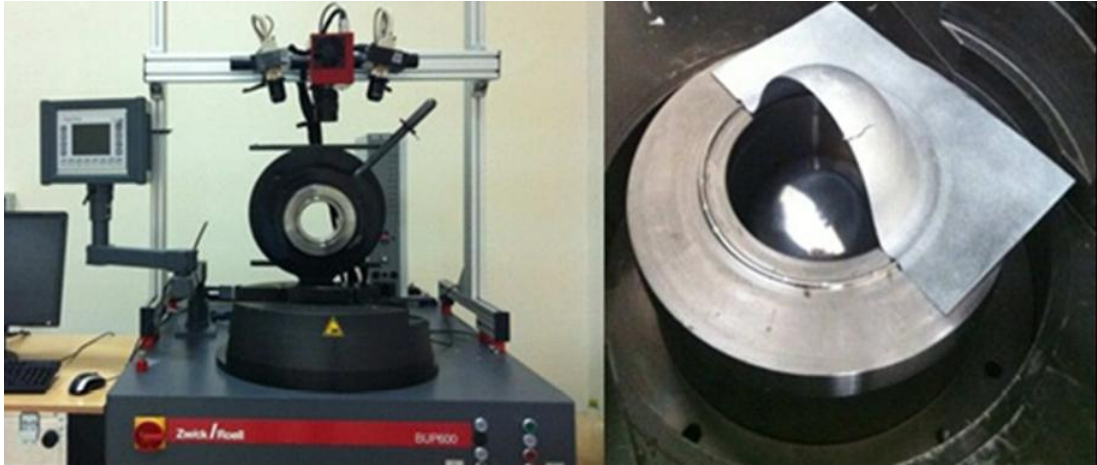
Zwick BUP 600 Test Device and general view of the half sheet specimen.
